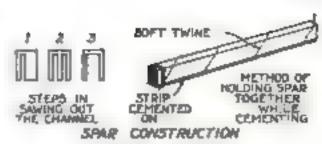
Method of making the hollow spar of balm wood and comeating on the cap piece.
